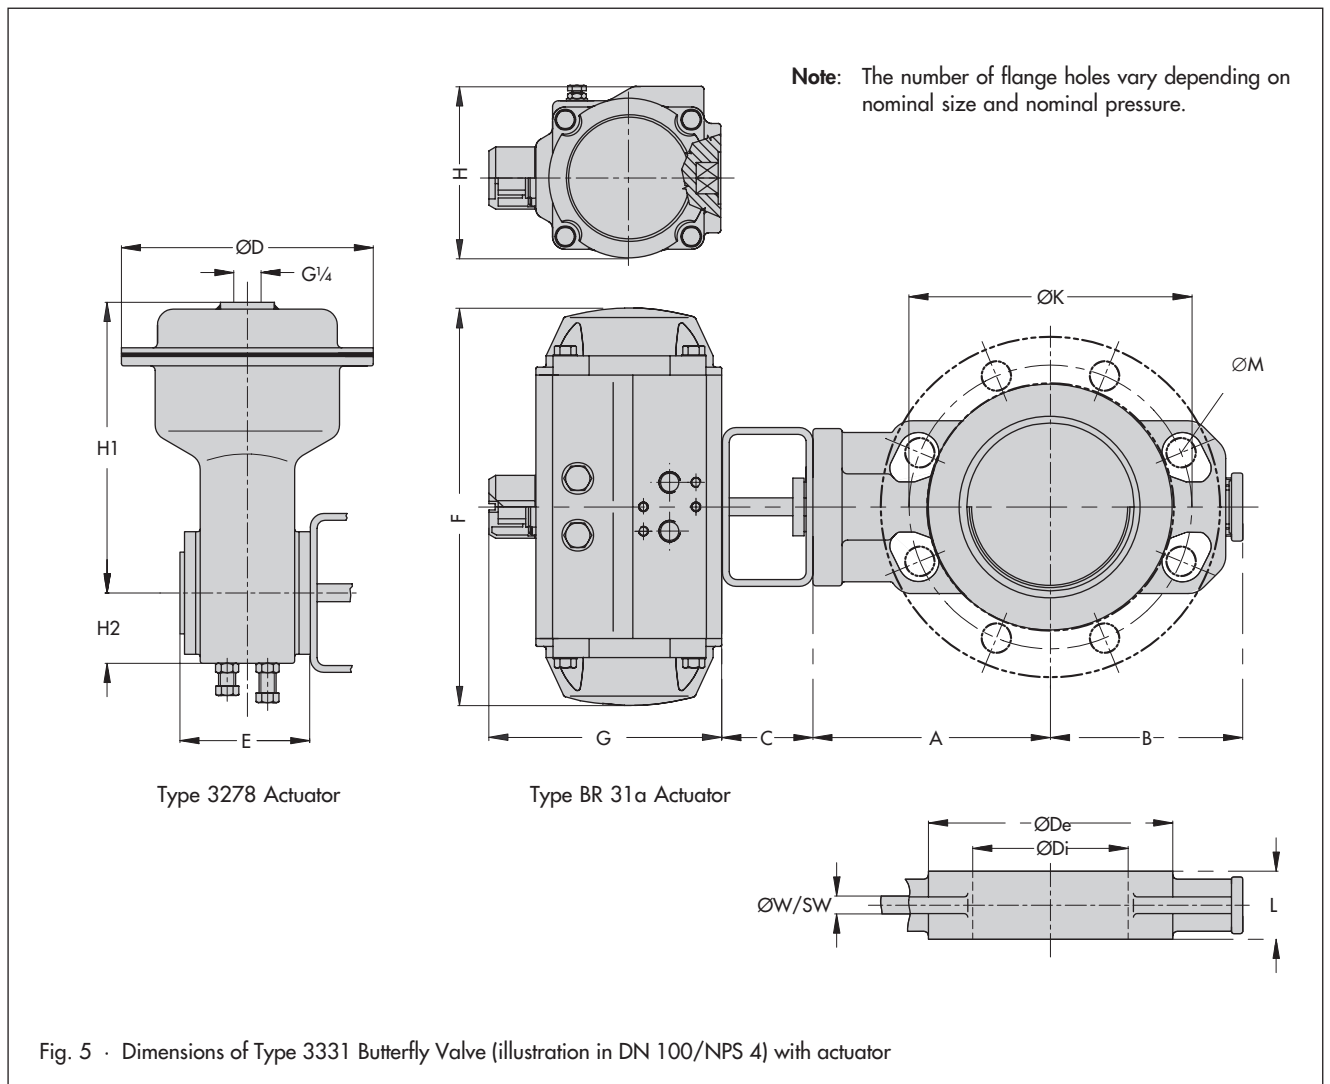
· Dimensions of Type 3331 Butterfly Valve (illustration in DN 100/NPS 4) with actuator
